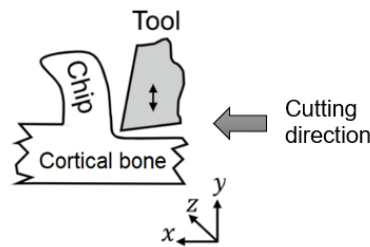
Vibration is superimposed in the feed direction of cutting tool
